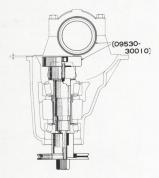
Differential Drive Pinion Adjusting Gauge Y5225
